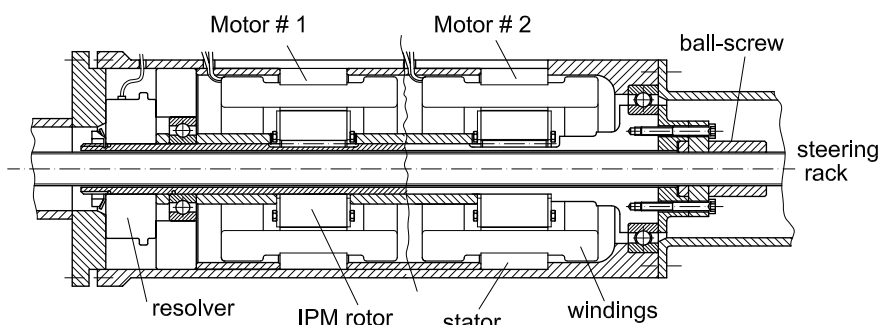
Electric power steering rack highlighting the two motors and the ballscrew system
